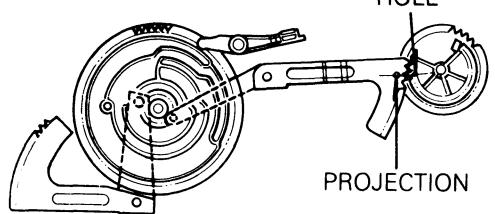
Rack Gear F.L/Rack Gear T/CAM Gear
